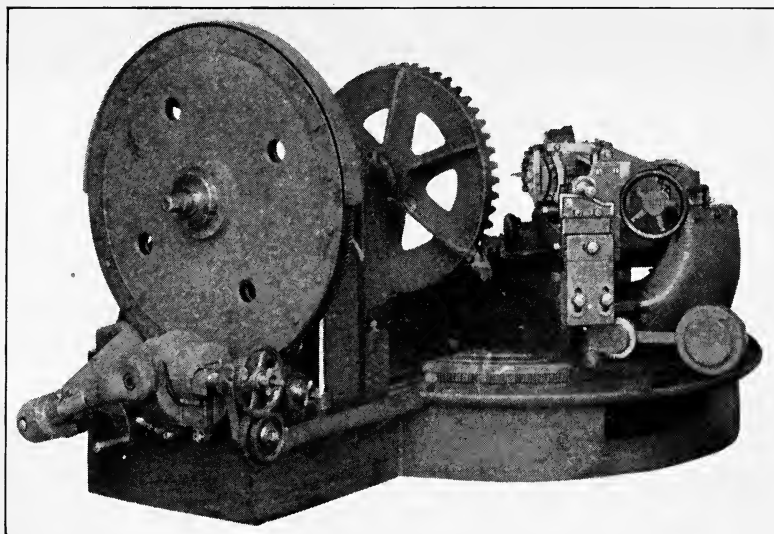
Gleason bevel gear cutting machine, templet system.
